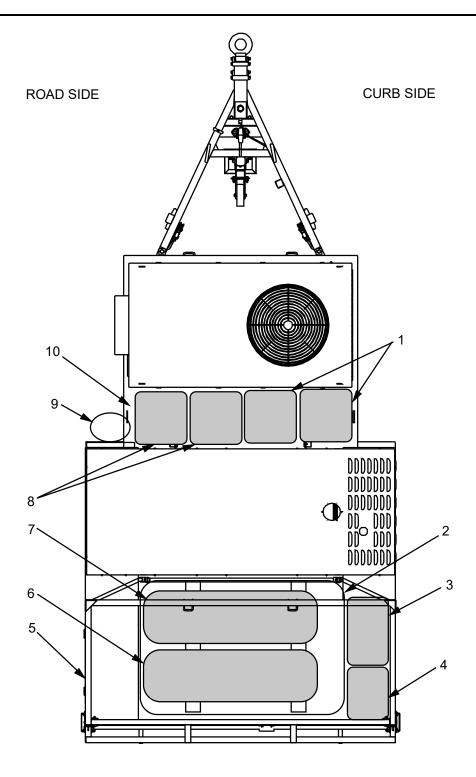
HP-2C/185 UST Trailer Loading Plan.
